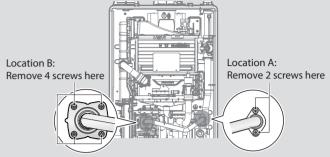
Detaching Gas Valve from Gas Inlet Pipe and Fan Motor Assembly
